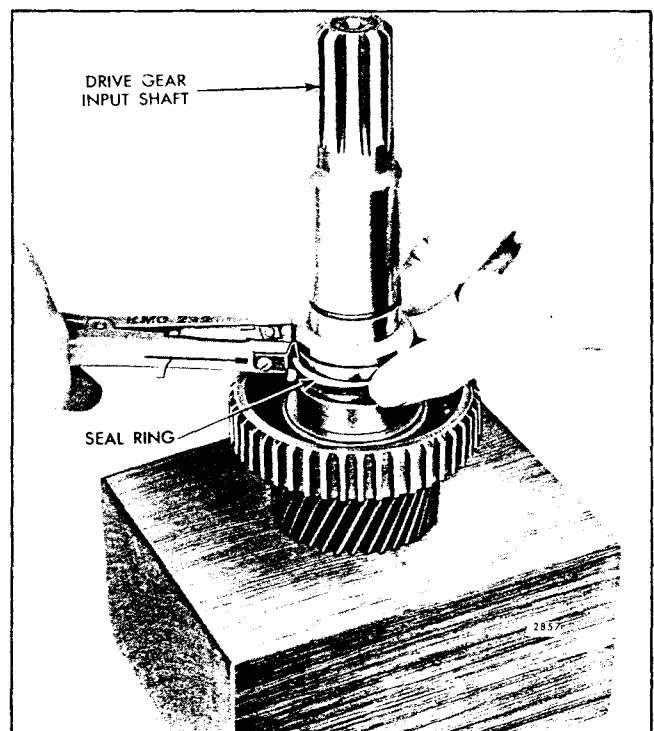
Removing Drive Gear Input Shaft Seal Rings from Shaft
